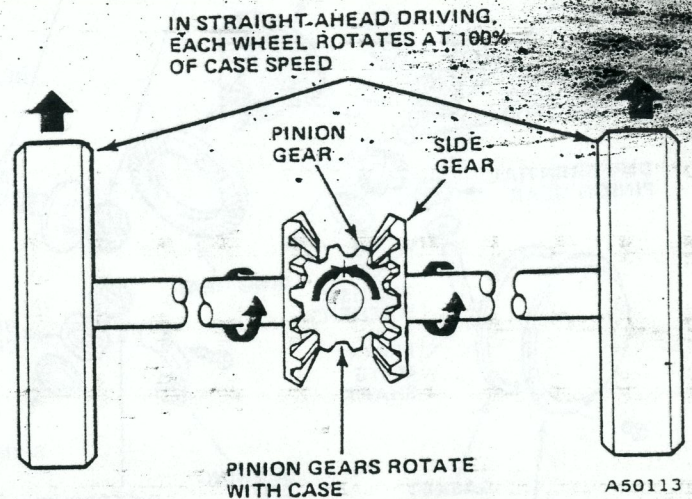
F-29 Differential Operation—Straight Ahead Driving
